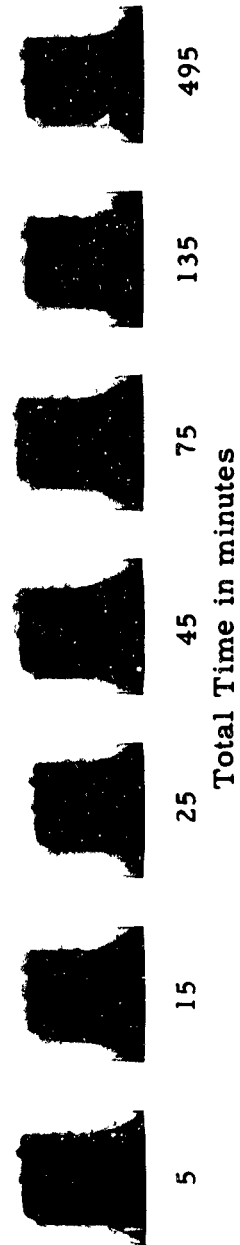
AUTORADIOGRAPHS OF 17 TOOTH FRESH GEAR
